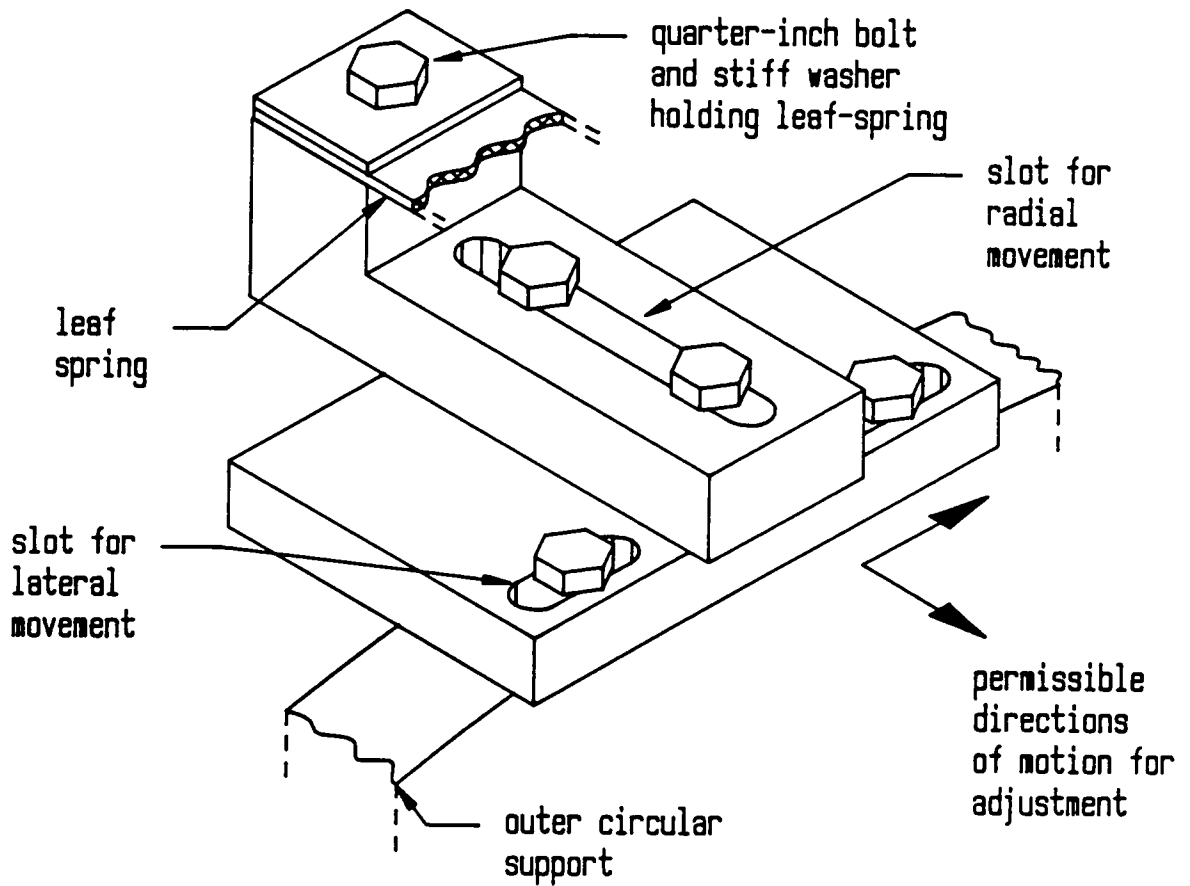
Leaf-spring mounting bracket assembly: The L-shaped mounting bracket assembly allows precise alignment of the leaf-spring in all directions.
